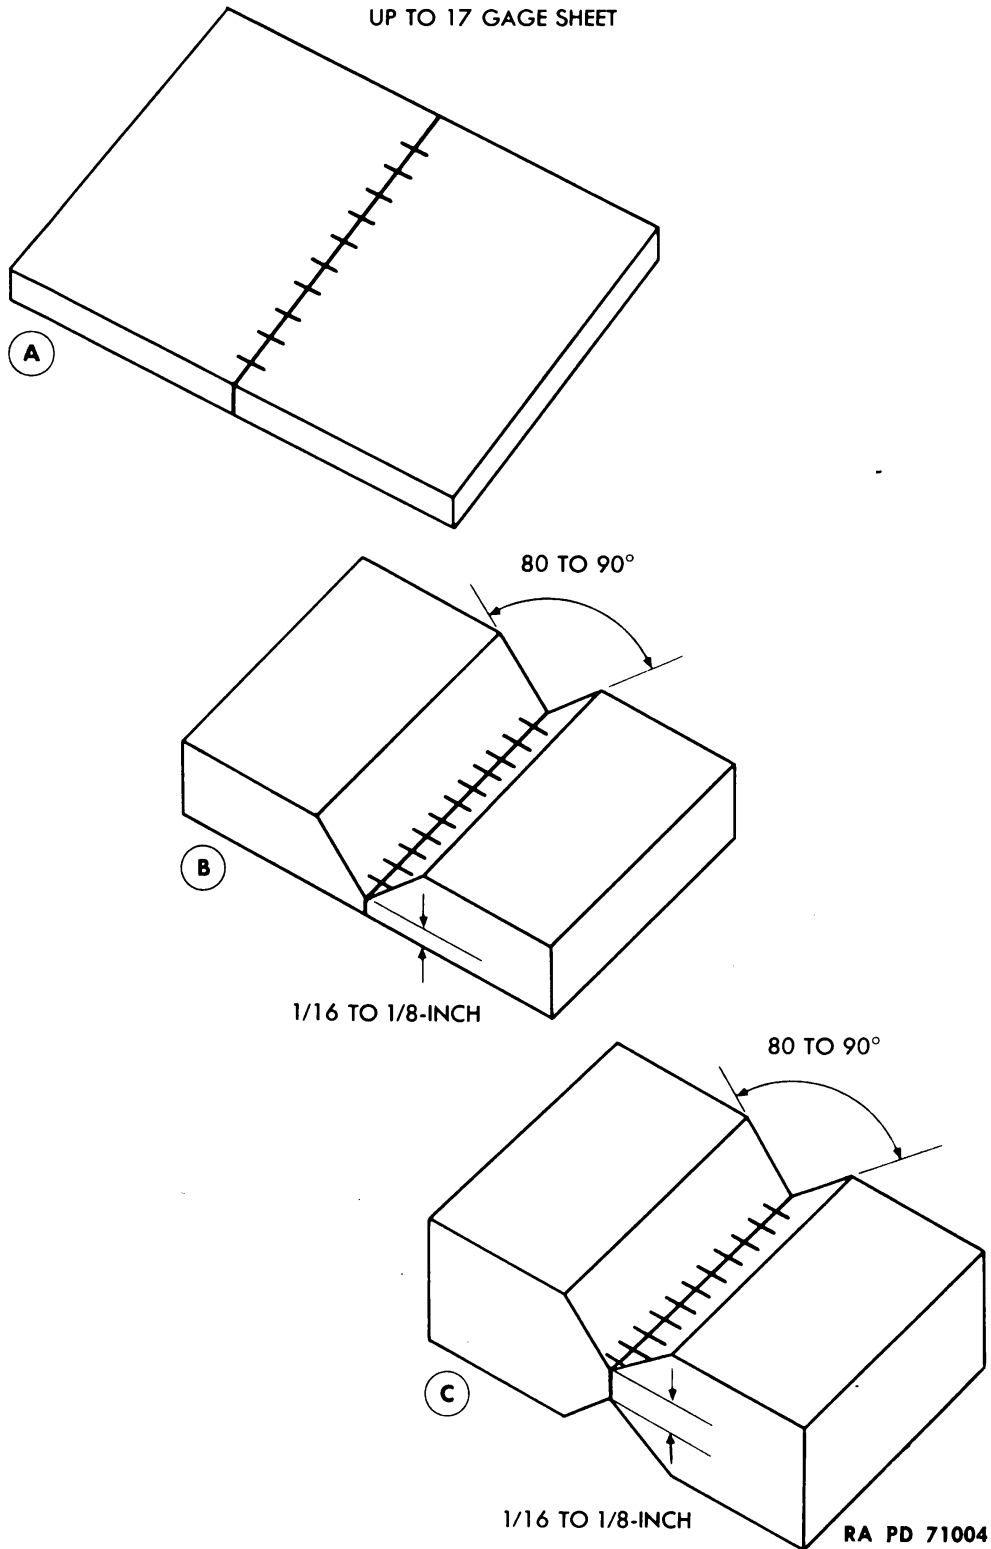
Square Butt Joint, Single V- and Double V-joints
